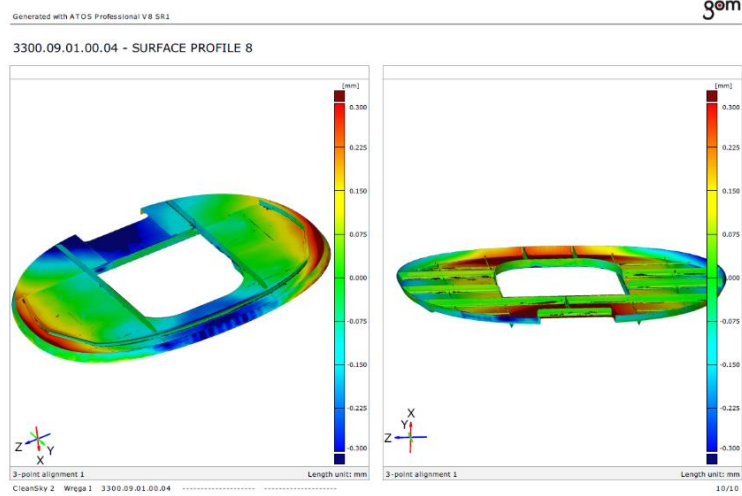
The maps of the linear dimensions and displacements of the frame elements after the mechanical machining: a) top side, b) bottom side
